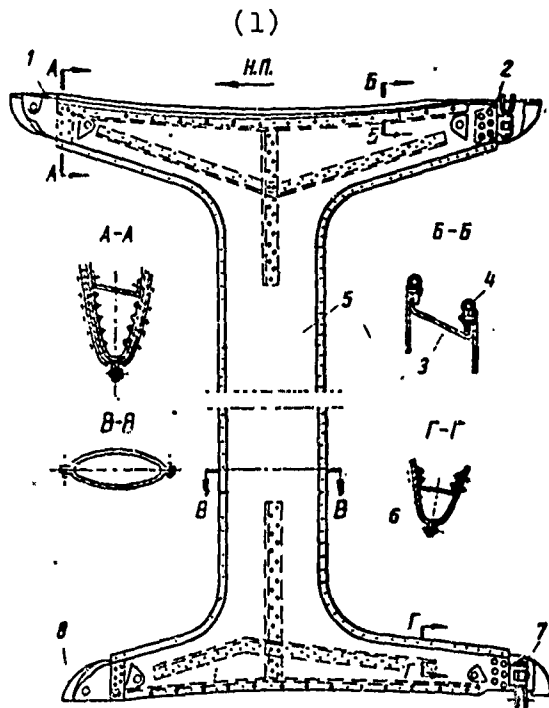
Biplane strut: 1 - front attachment joint; 2 - rear attachment joint; 3 - end plate; 4 - rubber gasket; 5 - side wall; 6 - reinforcing section; 7 - adjusting screw; 8 - protector.
